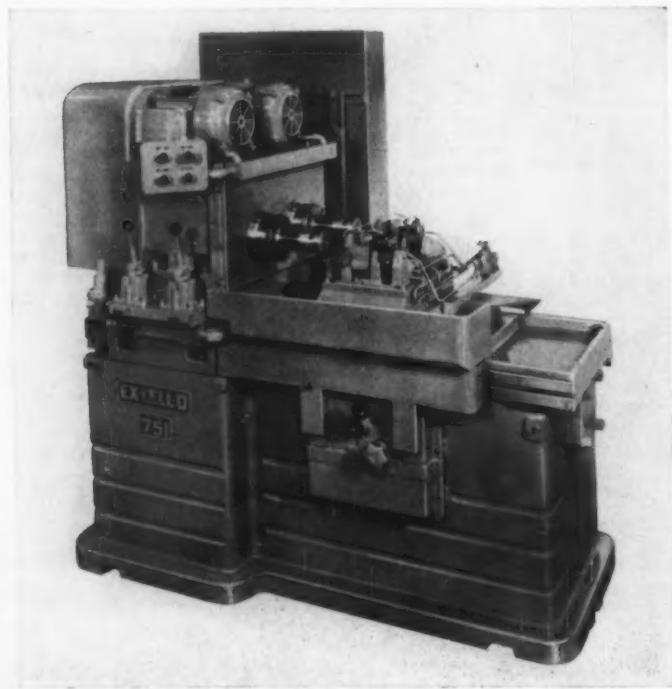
Machine equipped to turn elliptical form and true cylindrical form simultaneously
